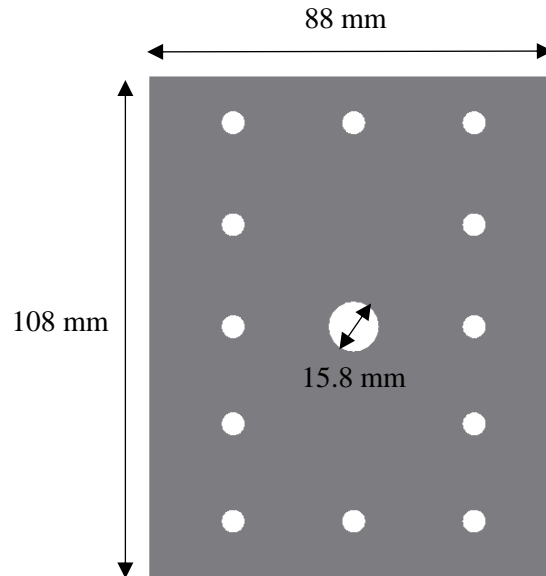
2.5 bar nozzle bulkhead – front view
